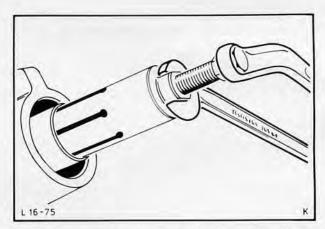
Extract extension housing bush with Special Tool No. 16-025
